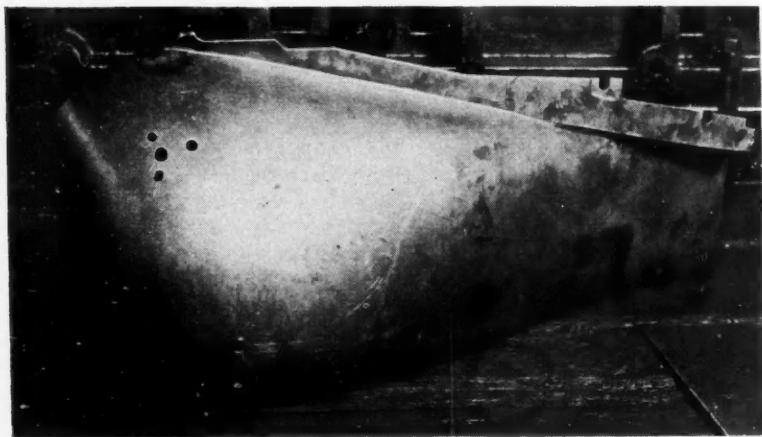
Budd front fender with hoodledge integral before flash-welding the radiator splasher
